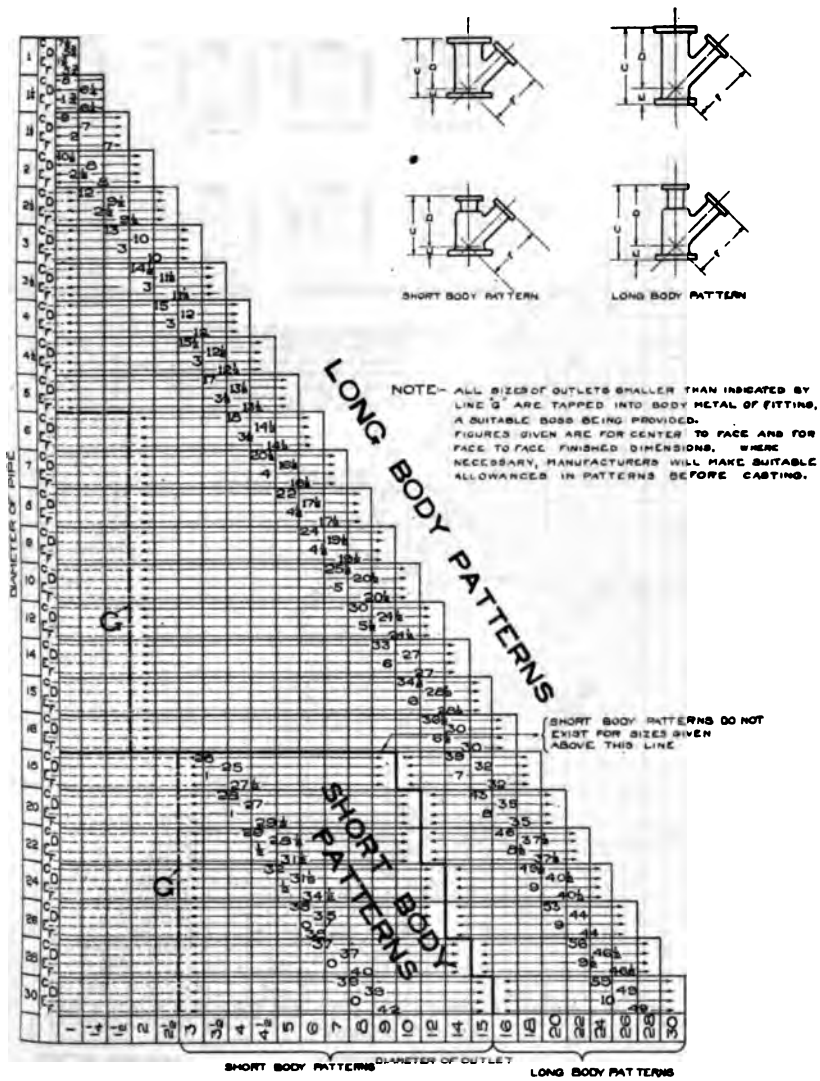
REDUCING LATERALS, LONG AND SHORT BODY PATTERNS, 125-LB. WORKING PRESSURE PER Sq. IN.
